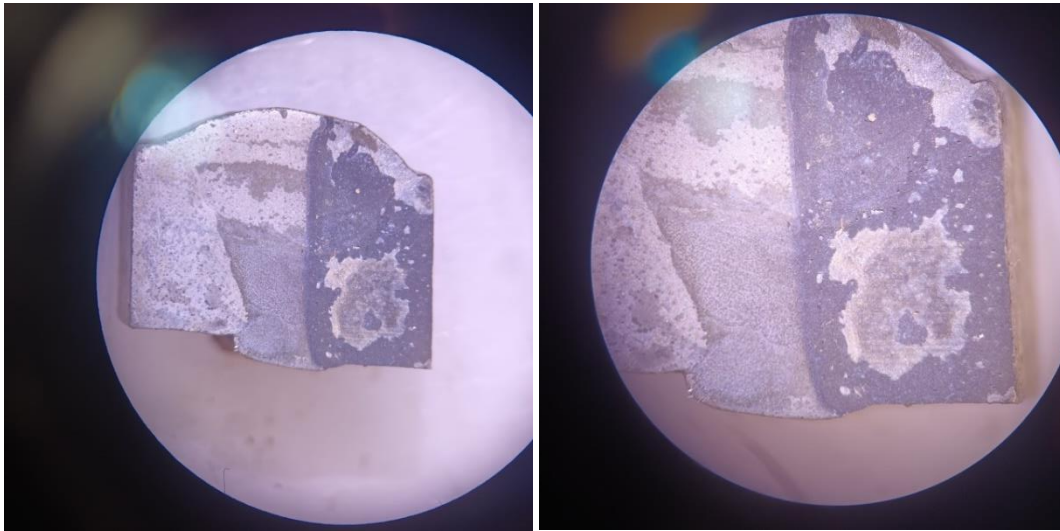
Polished side with etched weld and corrosion layer on the not submerged part of the specimen
